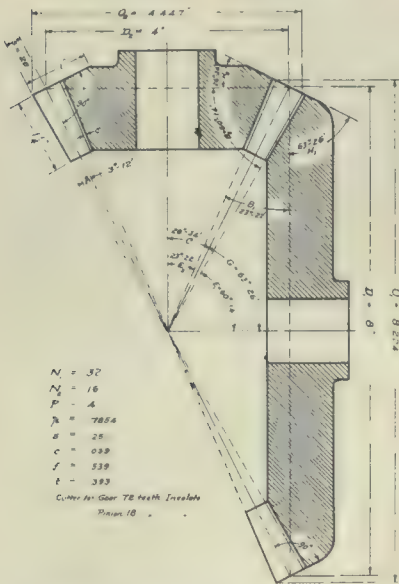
Pair of Bevel Gears, Shafts at Right Angles.
